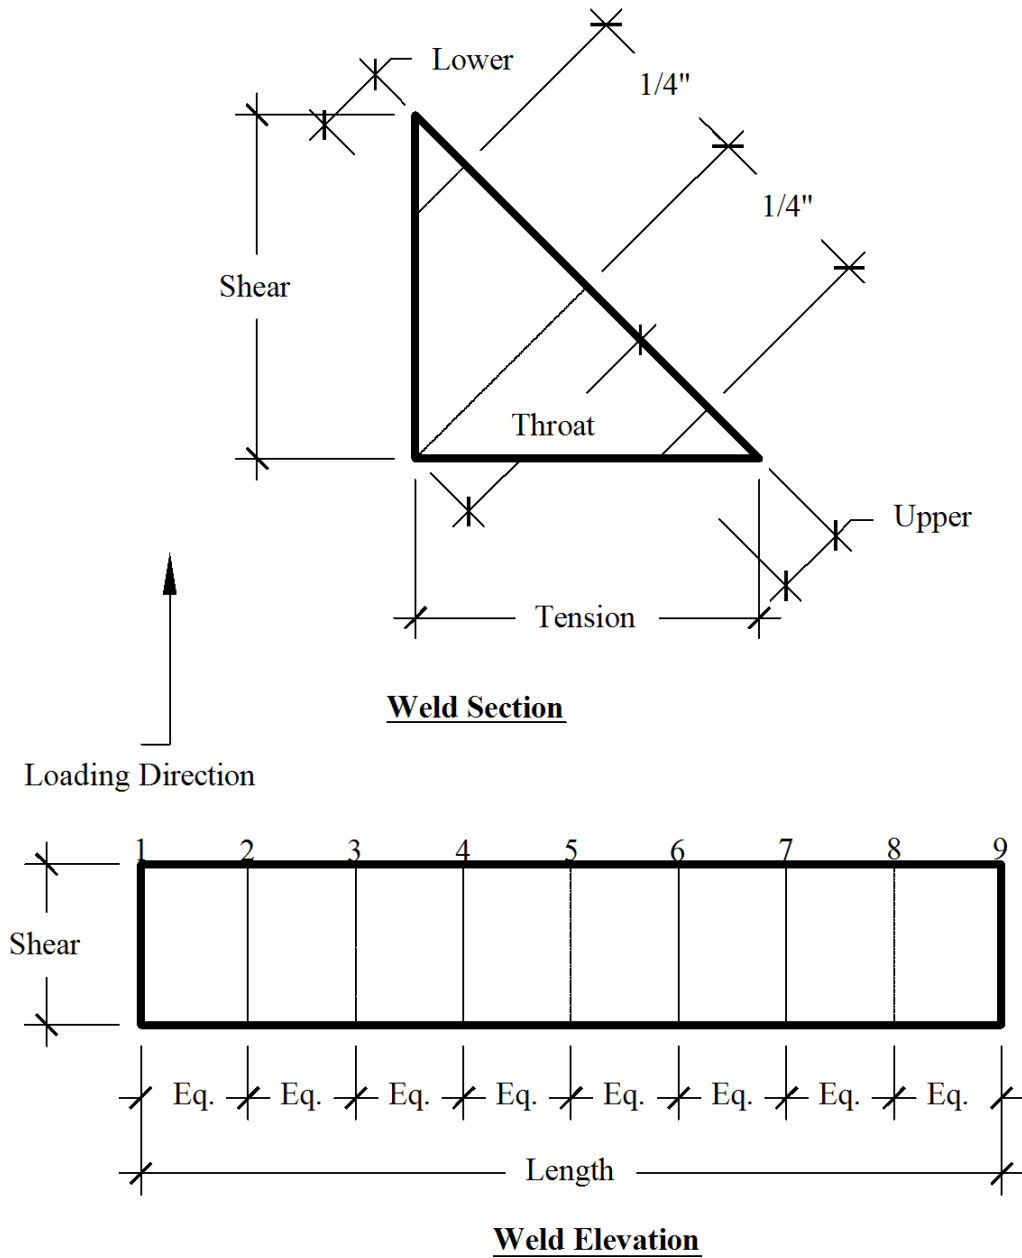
Pre-fracture weld measurement locations
